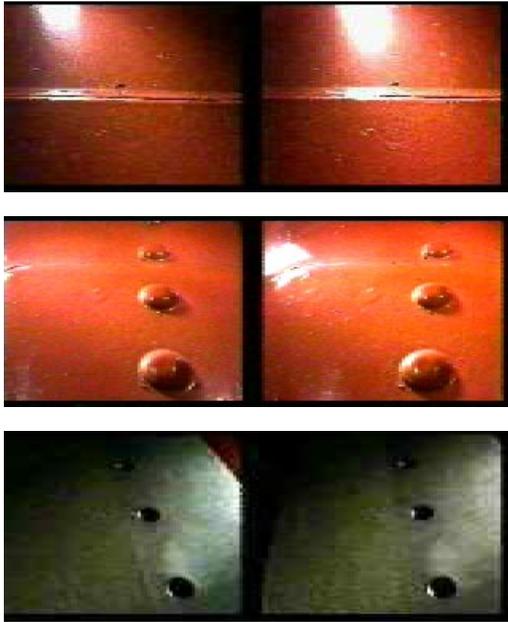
Three left and right eye 3D-stereoscopic views from the 4.5x 3D-stereoscopic camera in the sensor pod. Top is a lap joint, middle is a row of buttonhead rivets, bottom is a sheet metal sample from a “defect library.” Note, in addition to the perspective differences between the two views (which stimulates depth perception), the distinct differences in specular reflections (which we believe stimulates texture recognition).
